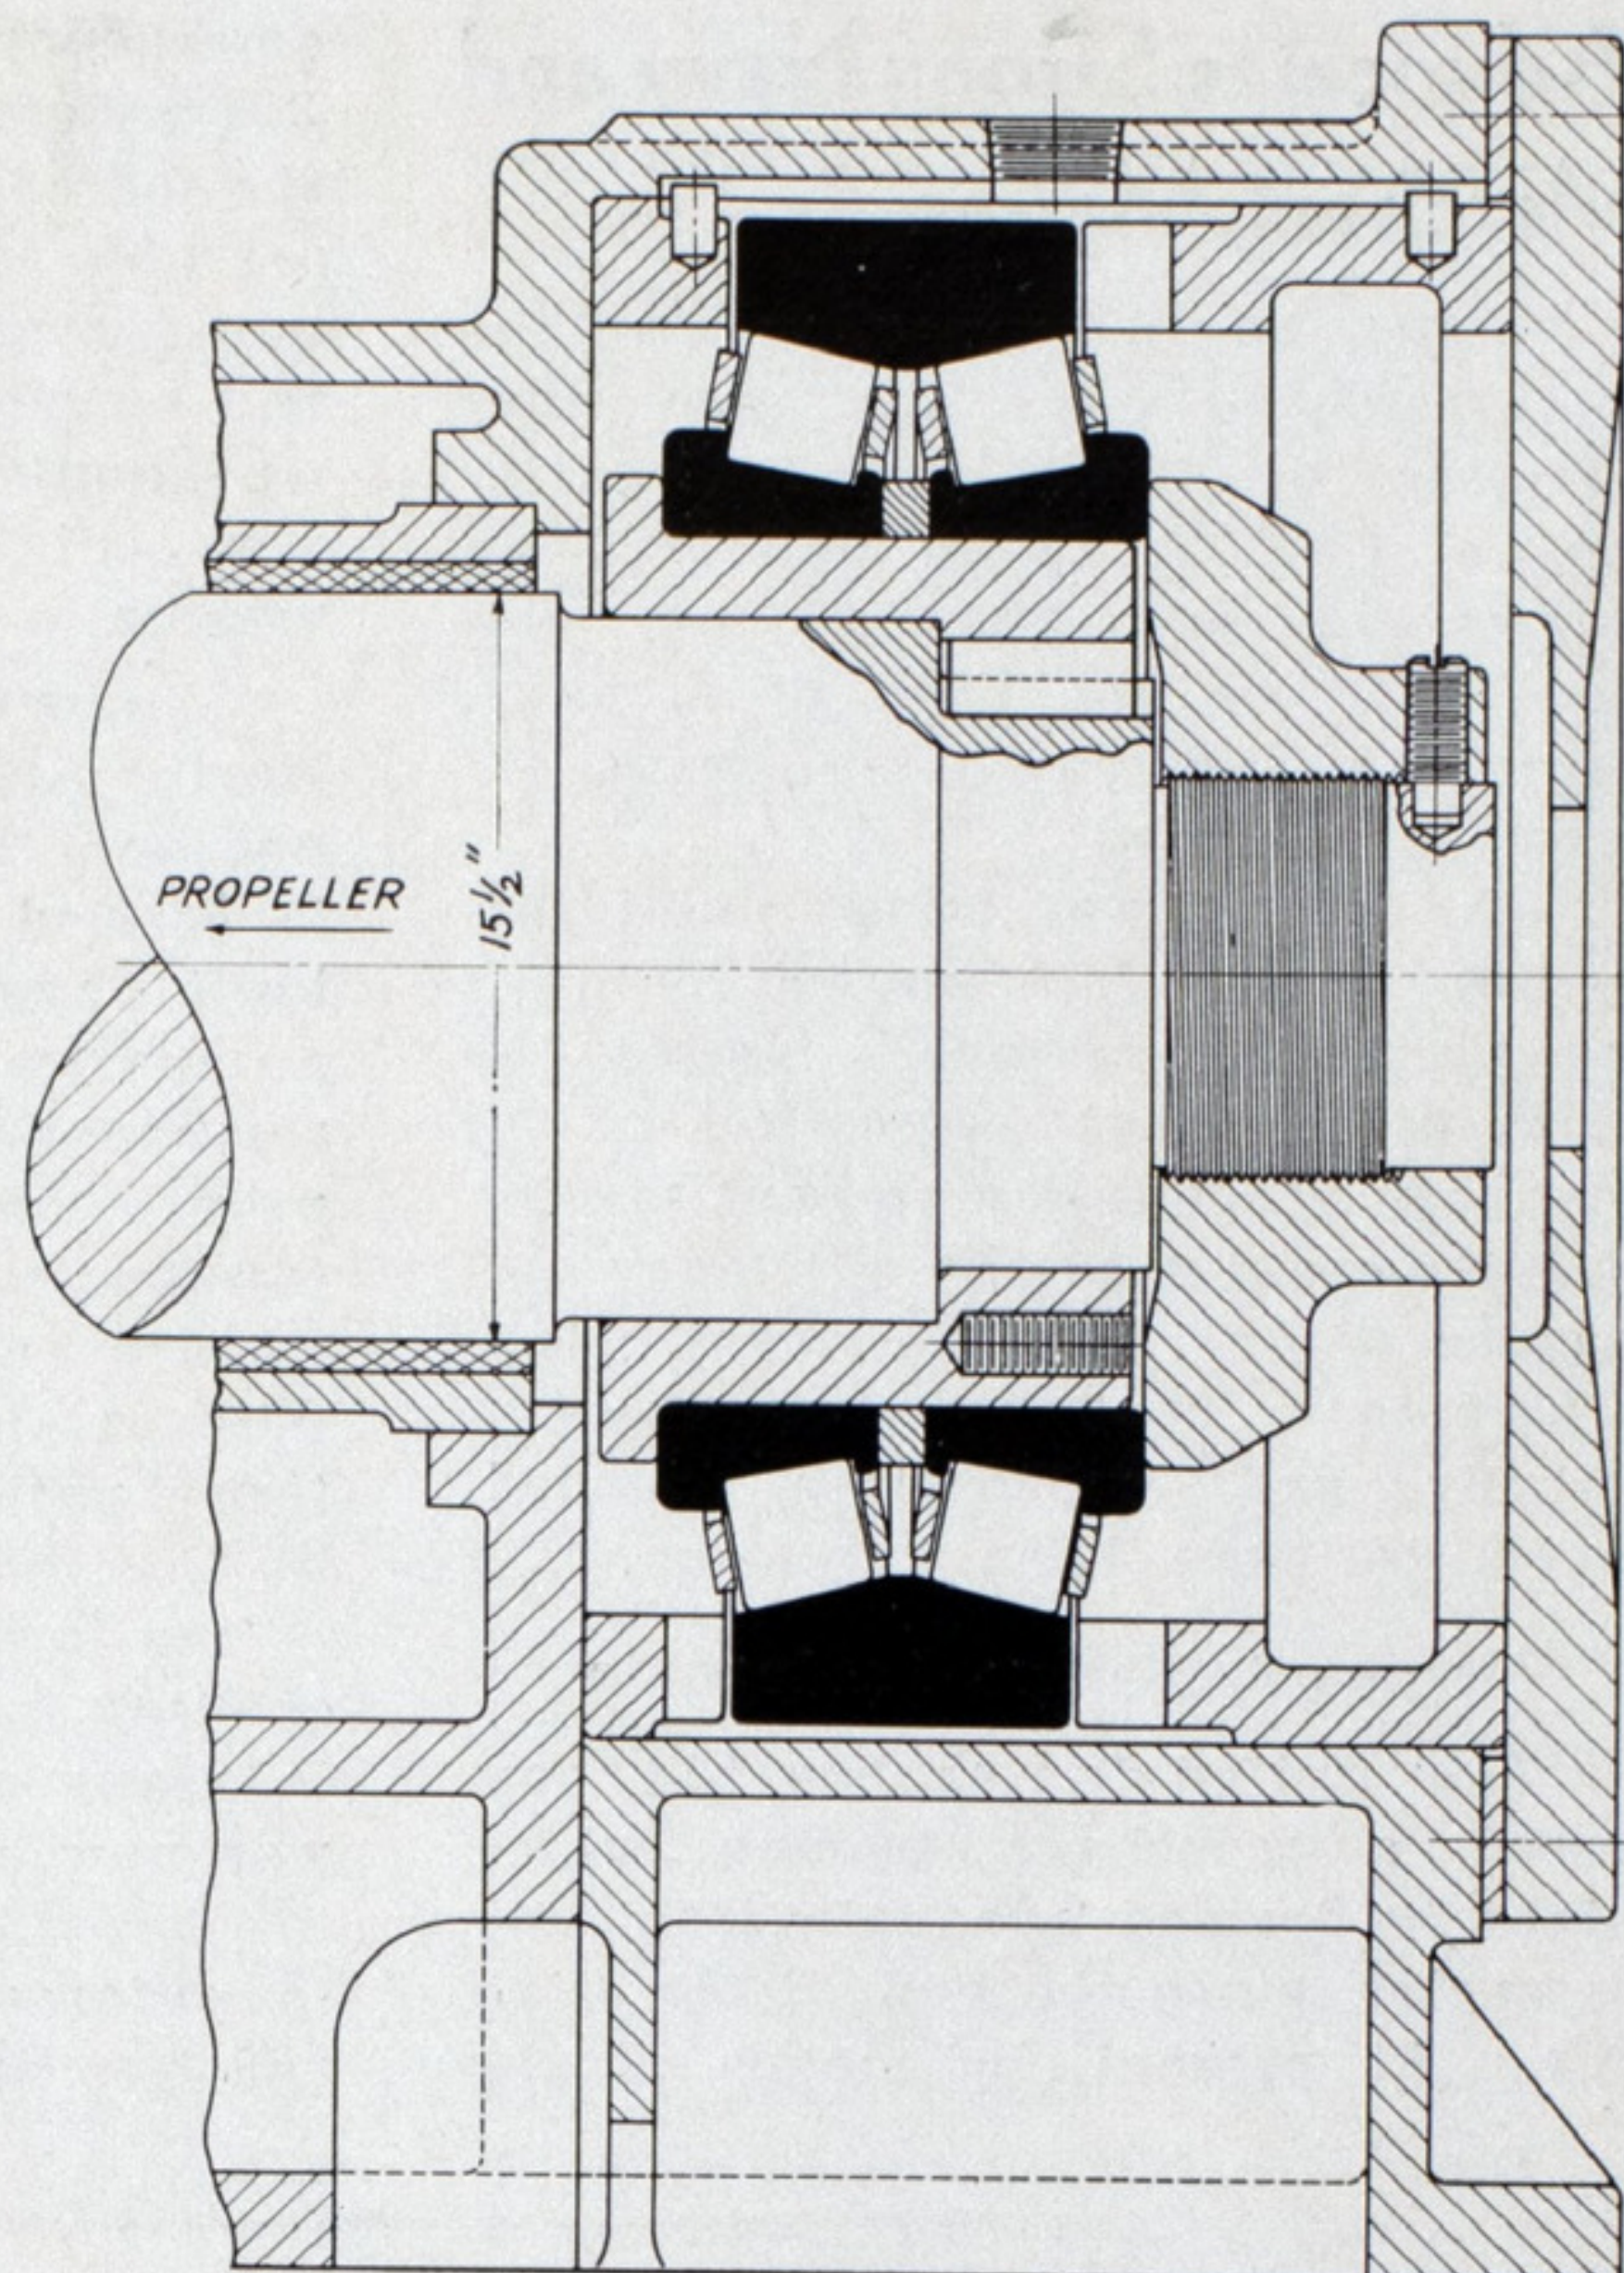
Tapered roller bearing thrust block unit as installed on one of the four propeller shafts on U. S. S. Concord. The bearing consists of a double cup and two single cones. Adjustment is made by means of the ground spacer between the cones. The bearing cones are mounted on a sleeve which is pressed on to the forward end of the propeller shaft
